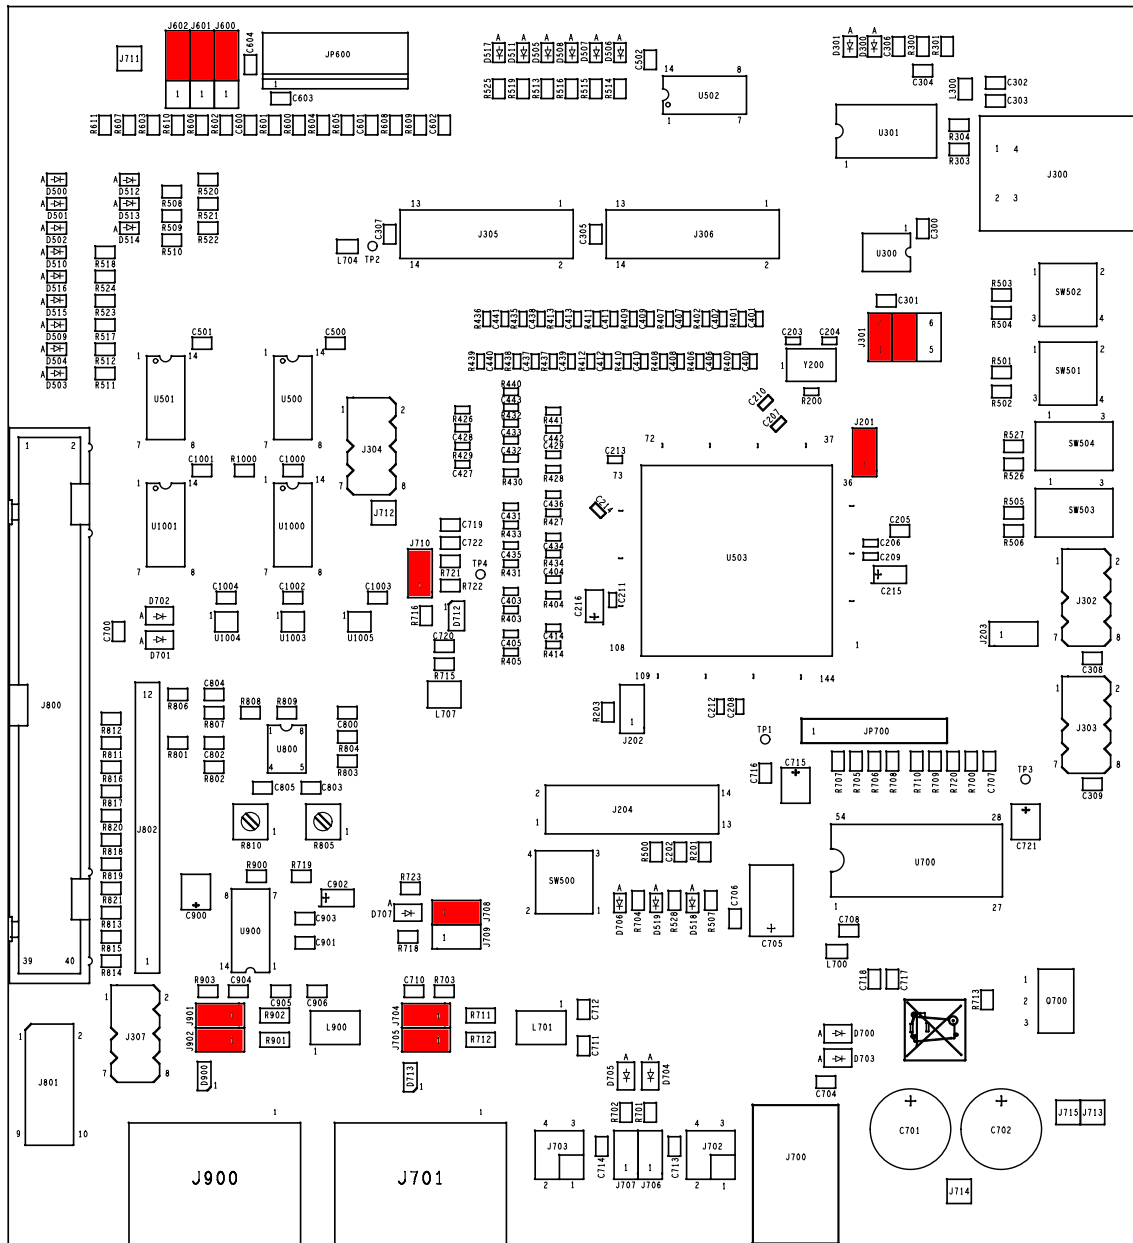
MPC560xB Controller Board Jumper Position and Default Setting
